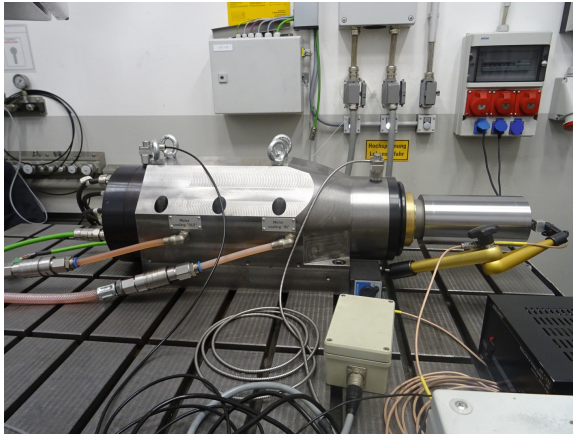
Motor spindle 2782.1 with tool dummy at test bench
